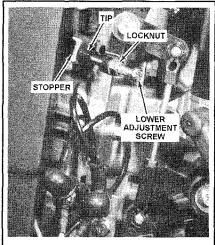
Rotate the lower adjustment screw until the tip contacts the stopper
